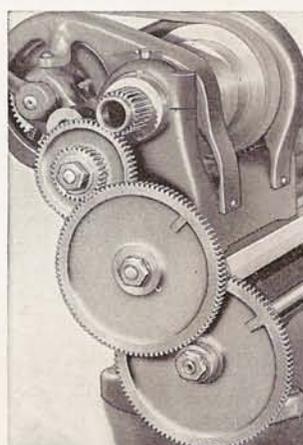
Gear Arrangement for Right Hand Automatic Longitudinal Power Feeds to Carriage.
